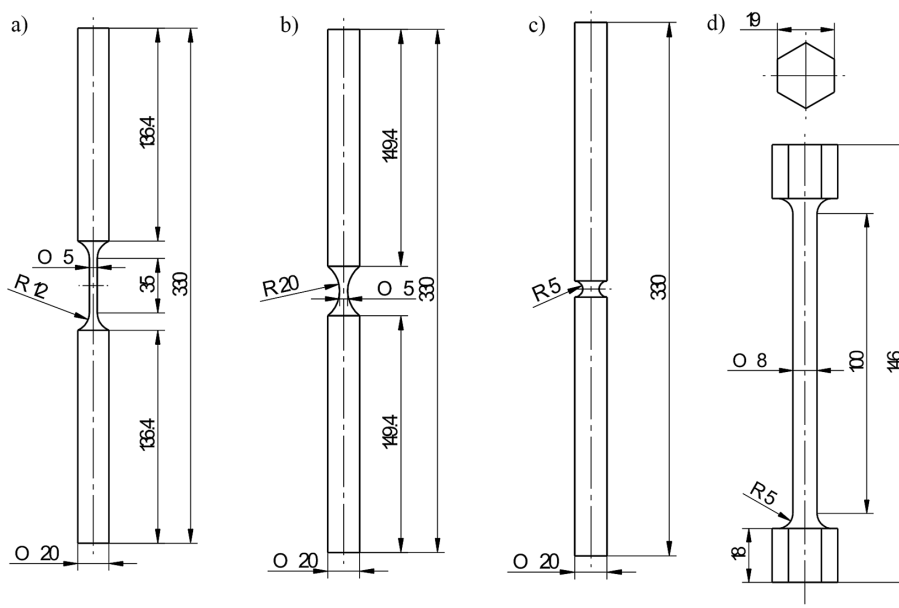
Samples used for calibration tests: (a) tensile test – type 1, (b) tensile test – type 2, (c) tensile test – type 3, (d) torsion test
